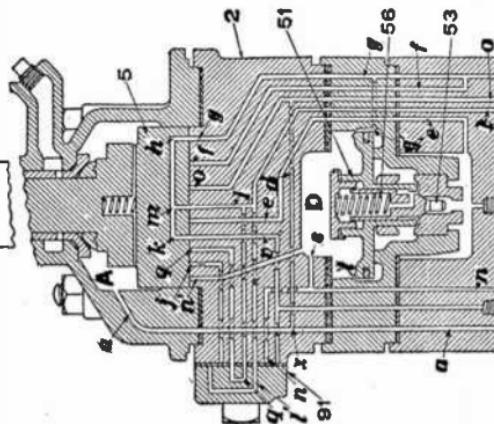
,342.—Westinghouse electro-pneumatic brake valve 3. Handle off position.
